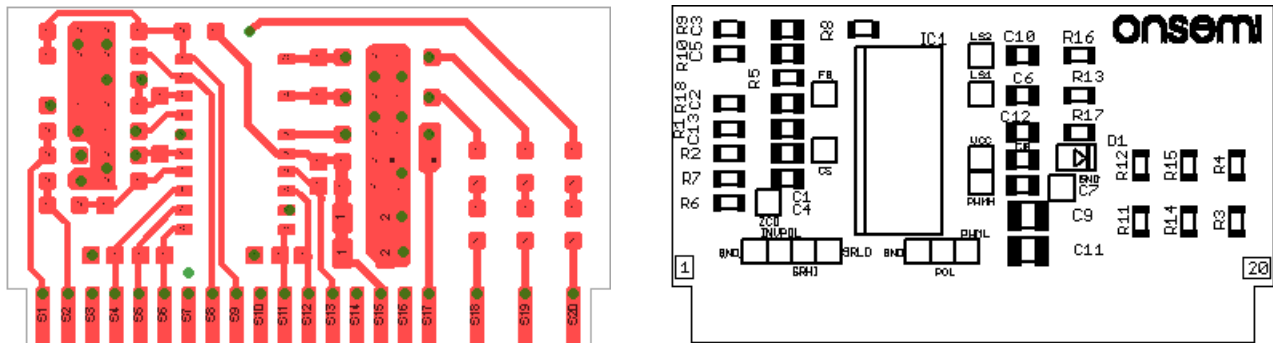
Top Layer PCB Layout and Assembly Plan of PFC CONTROL CARD
